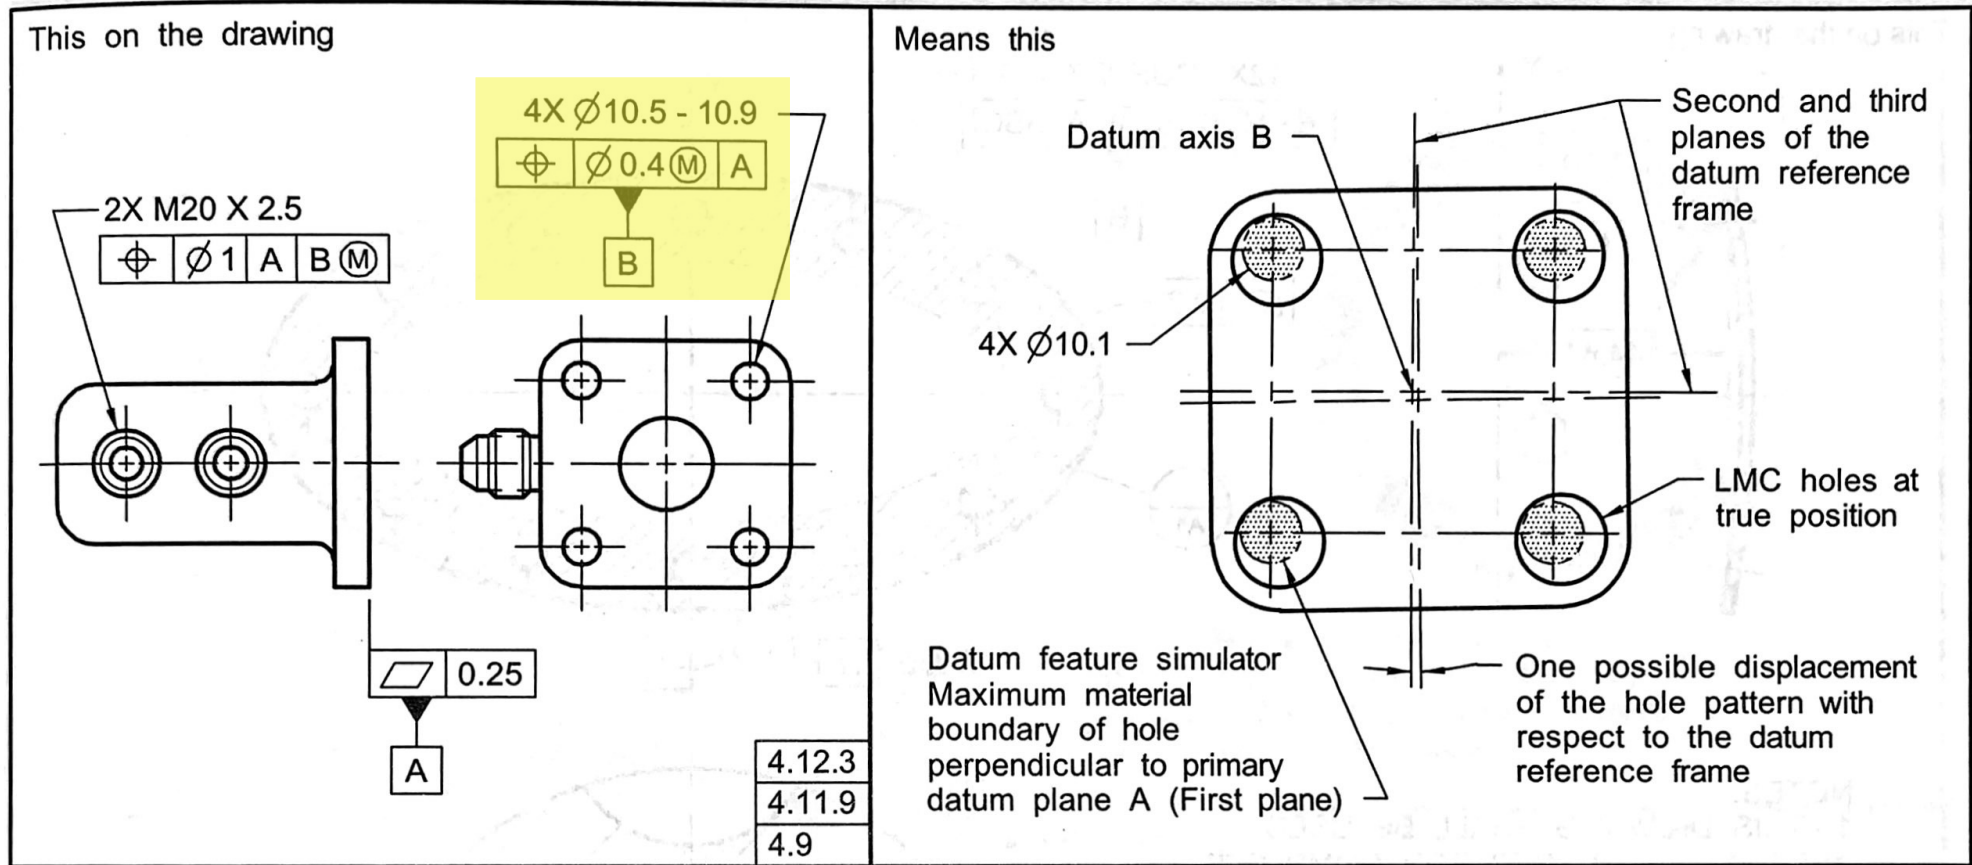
Hole Pattern Identified as Datum
